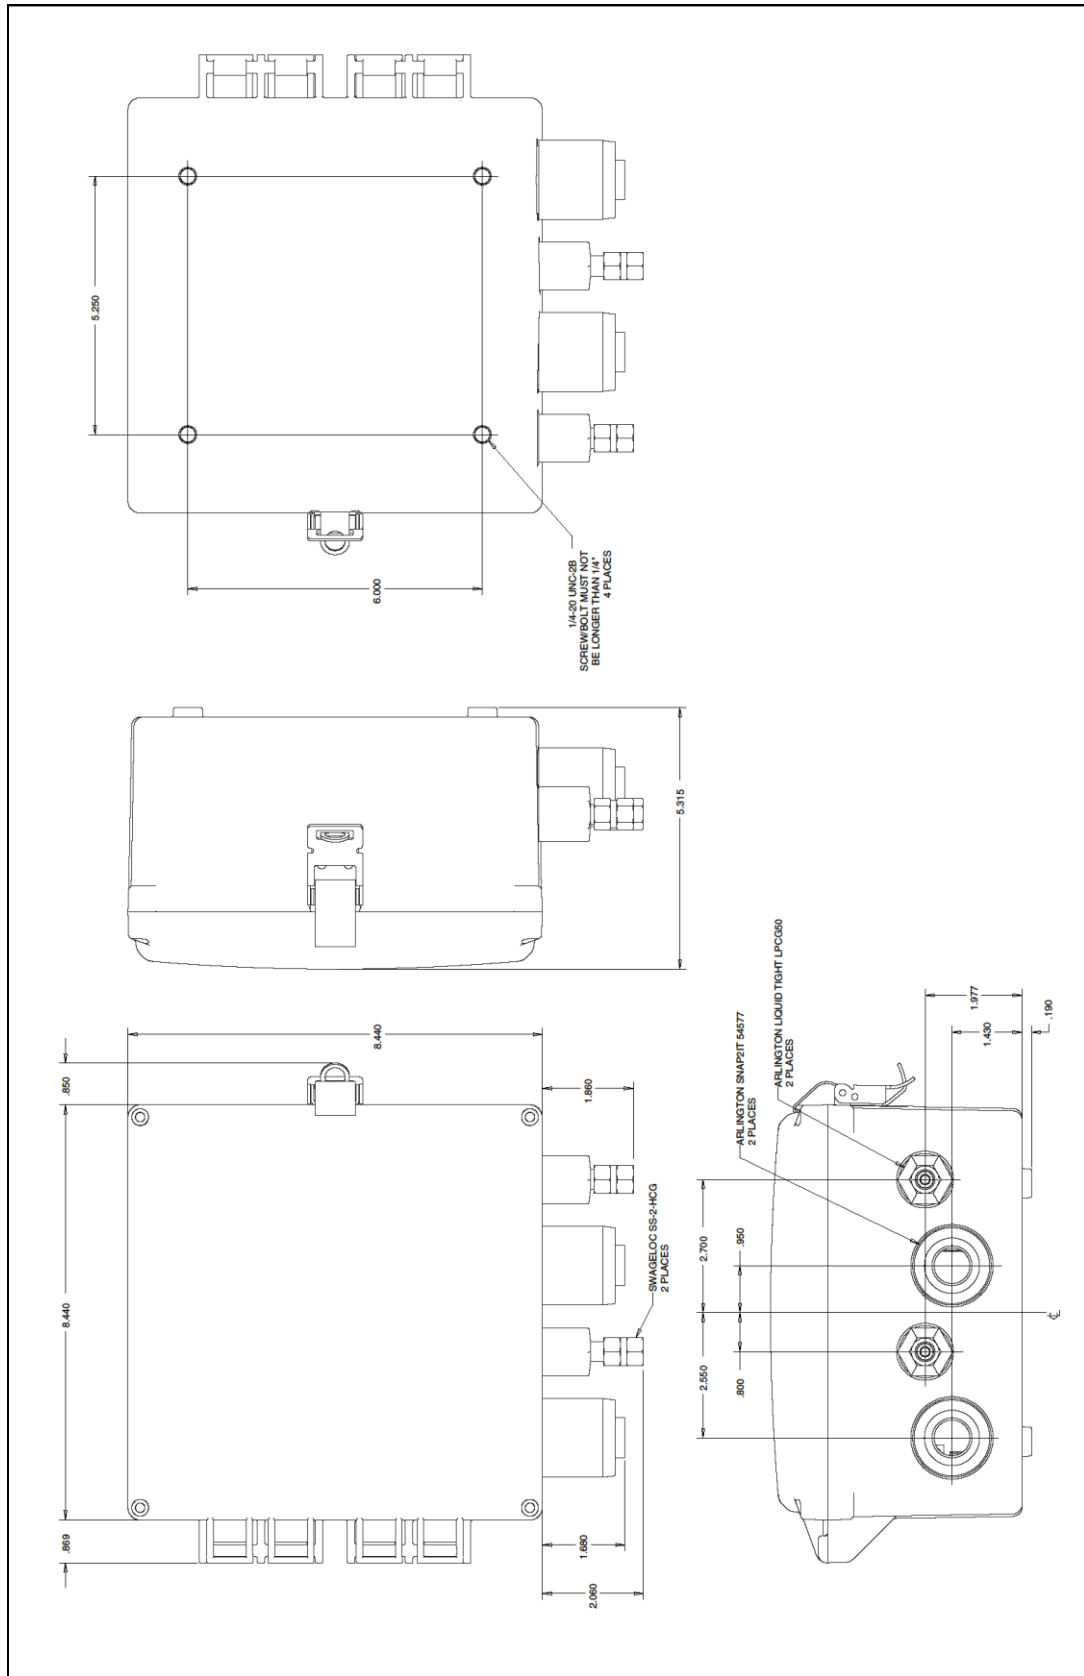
GPA-2000B MECHANICAL DRAWING (NO MOUNTING FLANGES)
